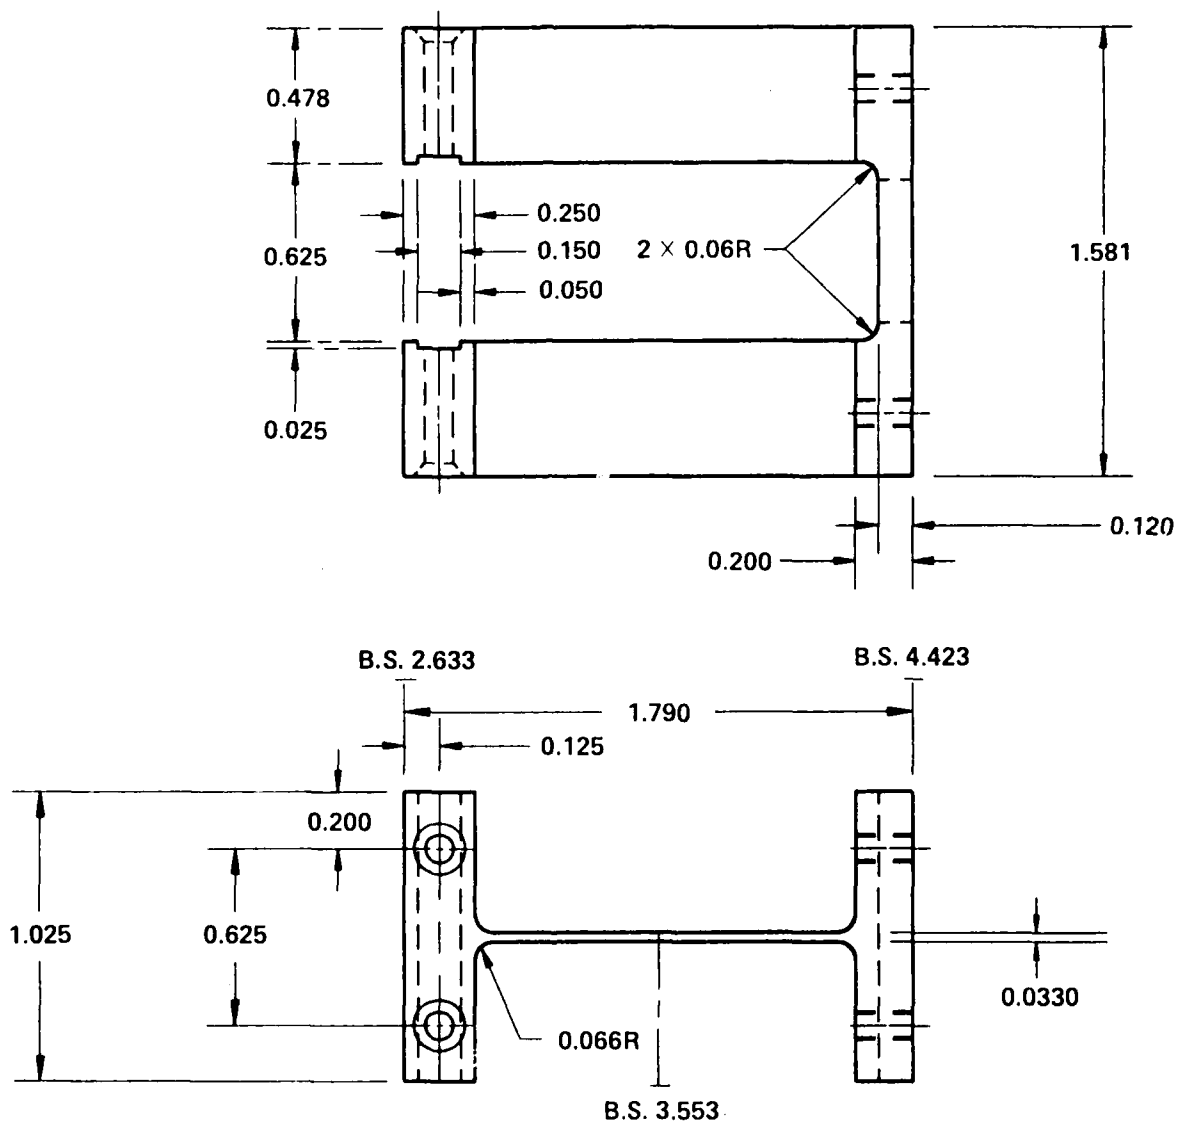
Flap flexure; 17-4PH H900 steel; dimensions in inches.
